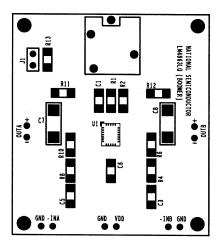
Recommended NHW PC board layout: Component-side Silkscreen
